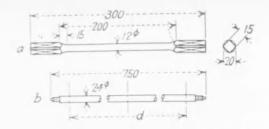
Apparatus for compressing (by cold rolling) the surface of cylindrical bars (Left) Fig. 2.—Specimens for fatigue testing: (a) Torsion specimen; (b) Rotating bending specimen; (d) Distance between the supports (670 mm.). All measures in millimeters
